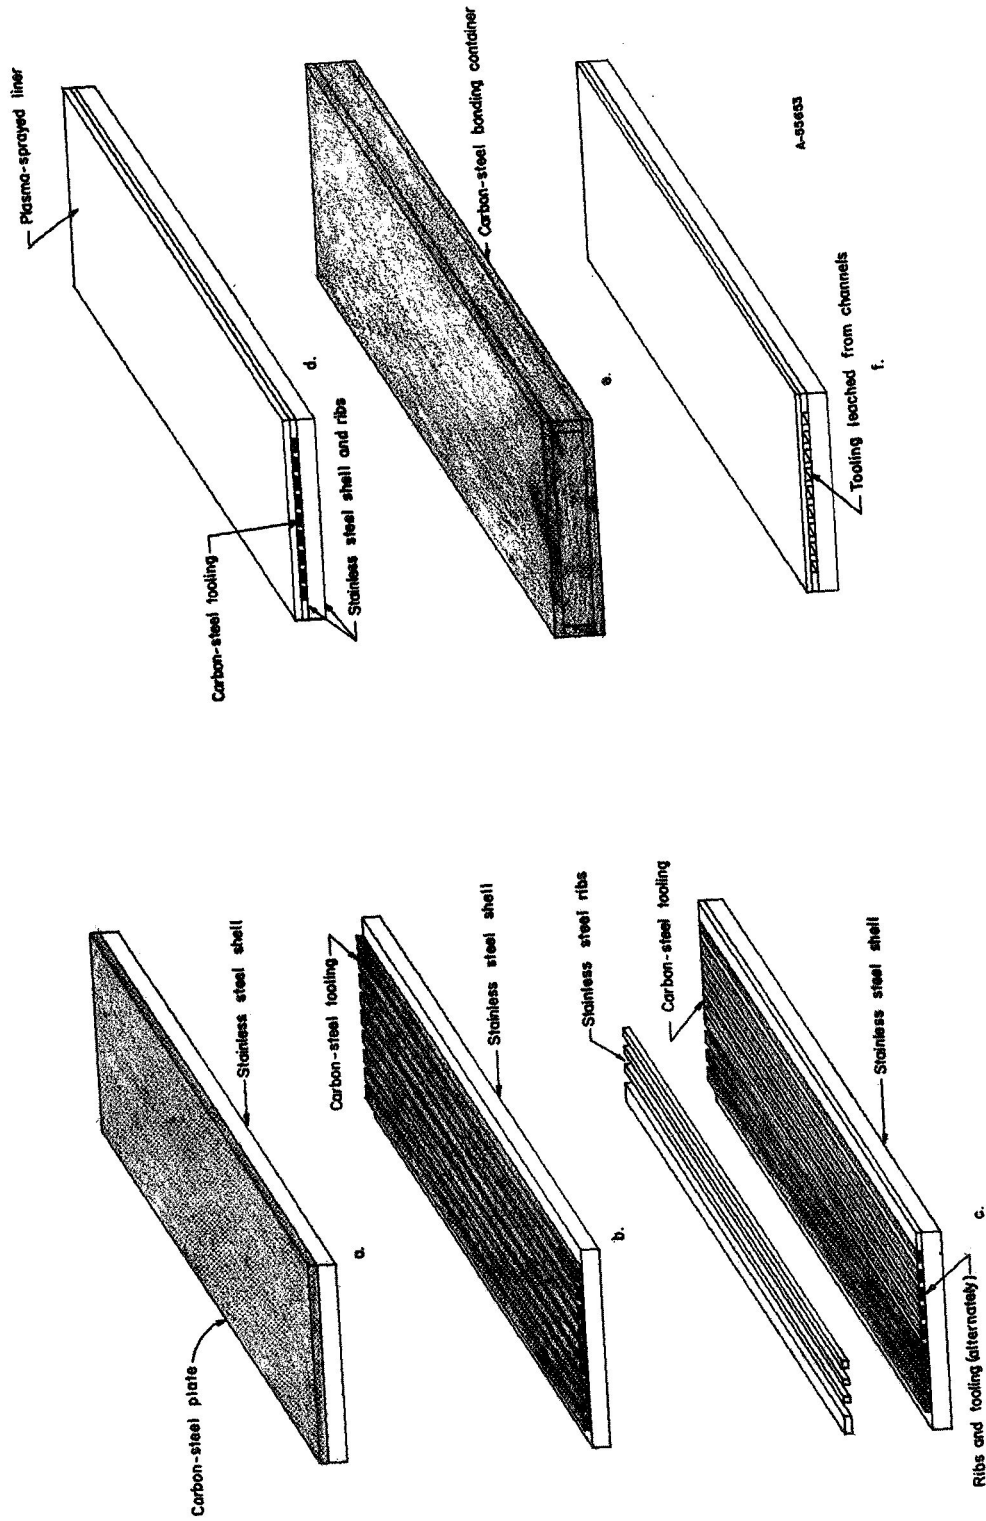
FLAT-PANEL-SPECIMEN ASSEMBLY
